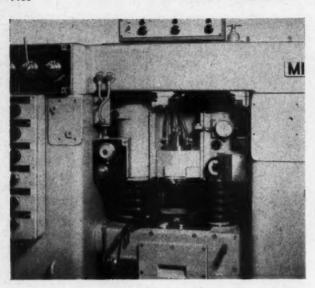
Close-up view of the grinding and work spindles on the Minganti machine
